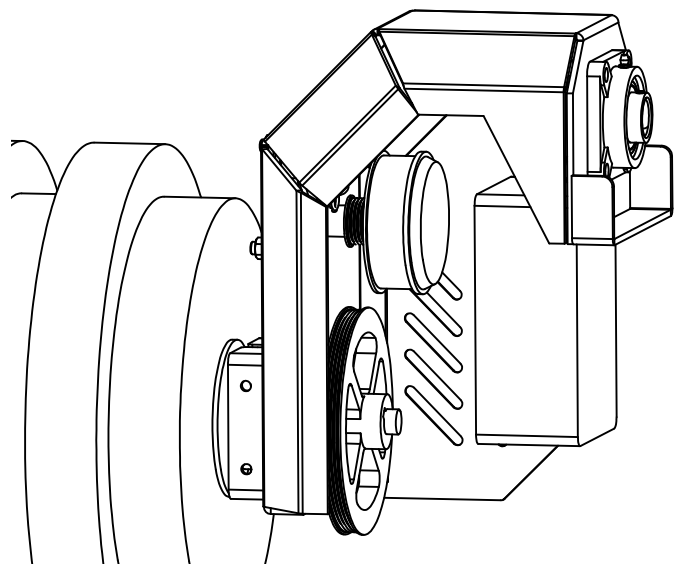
A close-up of the Cow-housing CAD-drawing with the mechanical concept implemented
